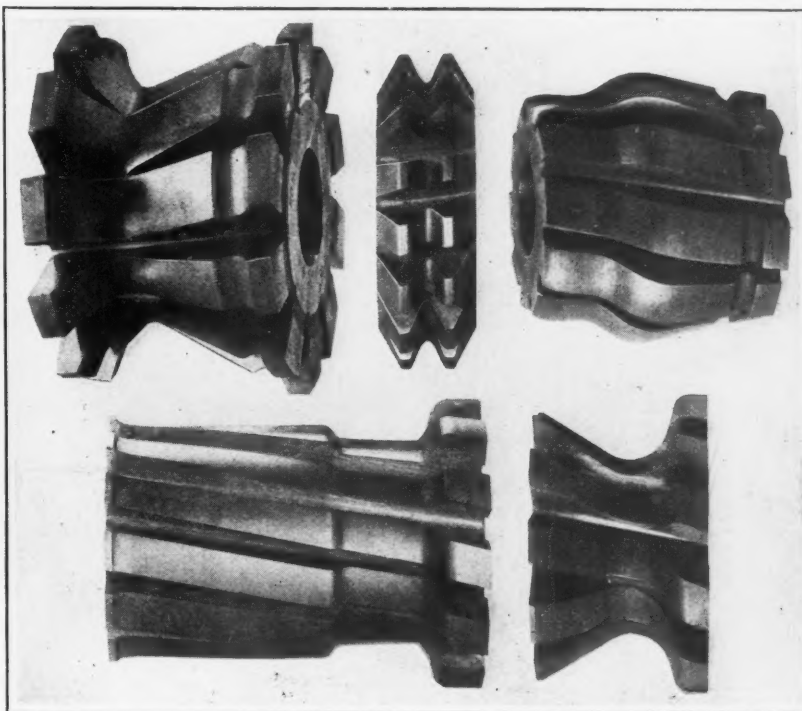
Examples of "Curvex" Milling Cutters, showing Diversity of Shape and Size
